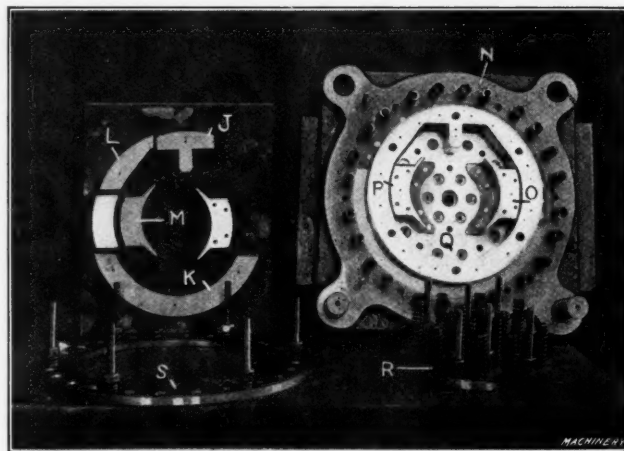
Lower Half of Die with Strippers removed; also Templets for the Punch Sections
